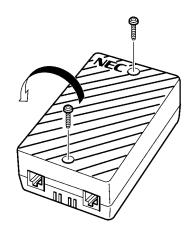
Removing the Screws from the SLT(1)-U() ADP
